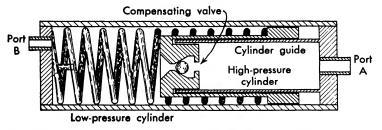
A schematic drawing of a hydraulic brake debooster.
